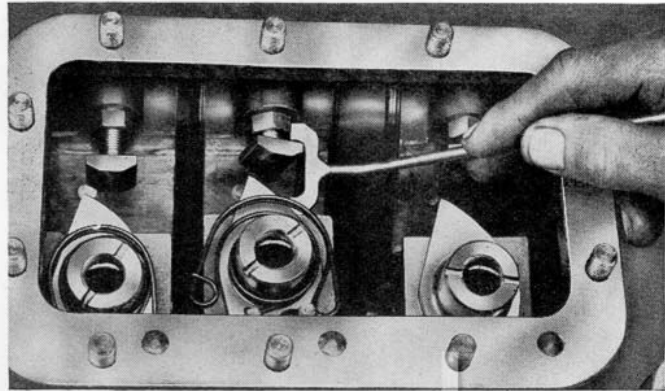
GAUGE APPLICATION. This shows where the gauge should be applied.
